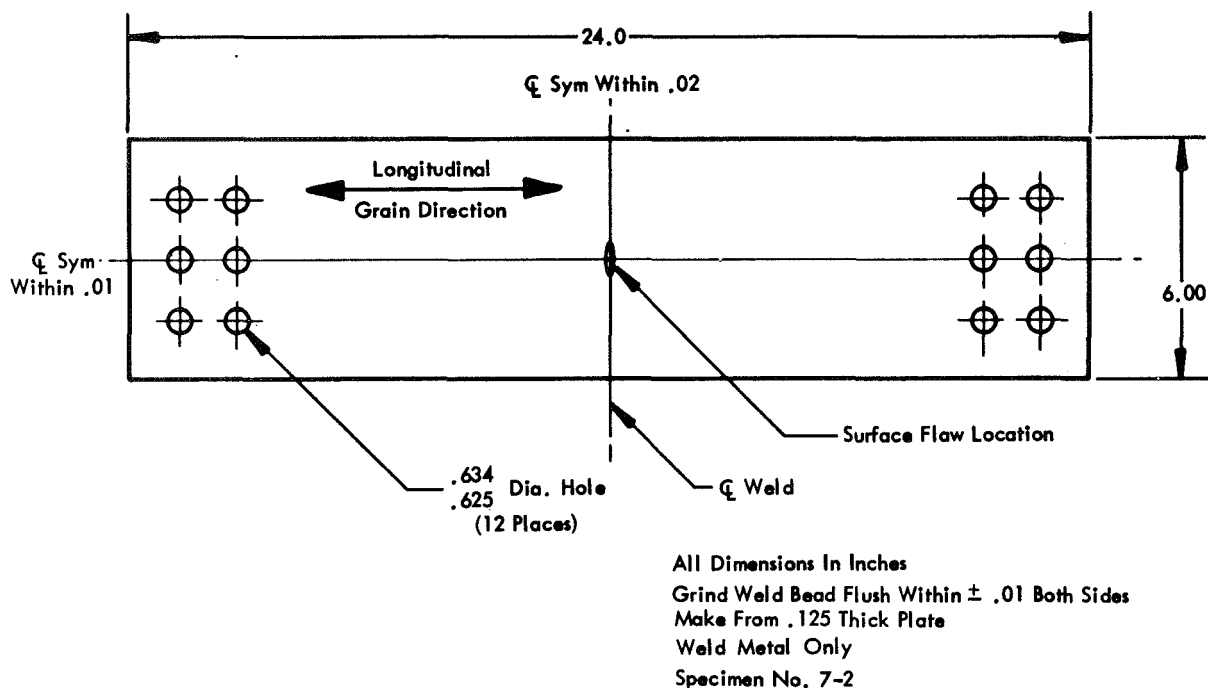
SURFACE FLAW SPECIMEN FOR 2219 ALUMINUM WELD
